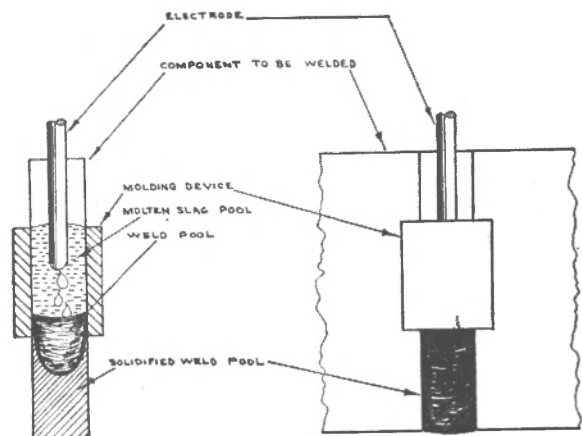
BASIC ARRANGMENT FOR ELECTROSLAG WELDING.
